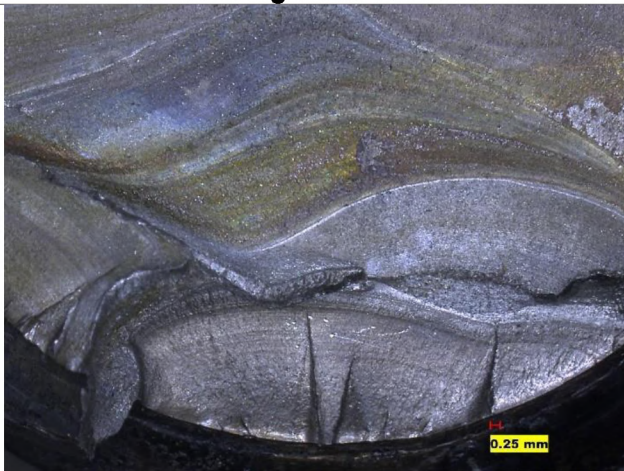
Fracture face of threaded bar showing multiple ratchet marks for crack initiation at the root of a thread
